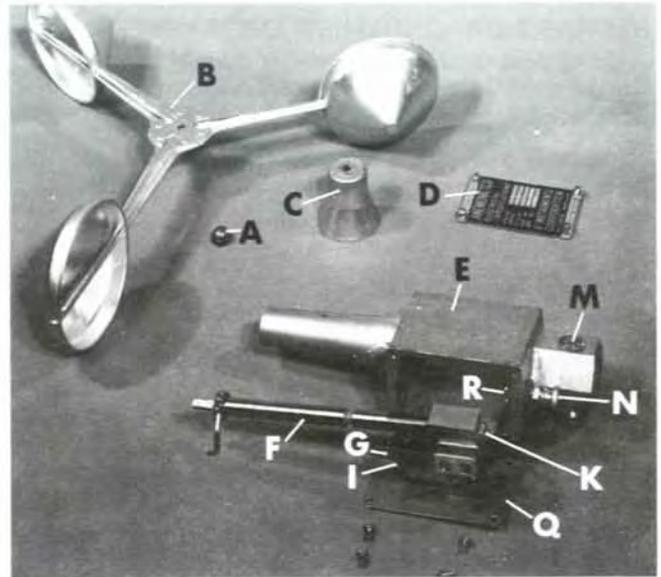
Small Airways type anemometer: A, cap nut; B, cups; C, rain shield; D, front cover plate; E, housing; F, spindle with worm gear; G, contact assembly; H, worm gear; I, worm wheel; J, upper ball bearing; K, lower bearing adjustment screw; L, thumb clamp screw; M, grounded terminal; N, insulated terminal; O, spindle retaining screw; P, mounting sleeve; Q, back cover plate; R, binding post screw; S, contact points; T, contact fingers.
